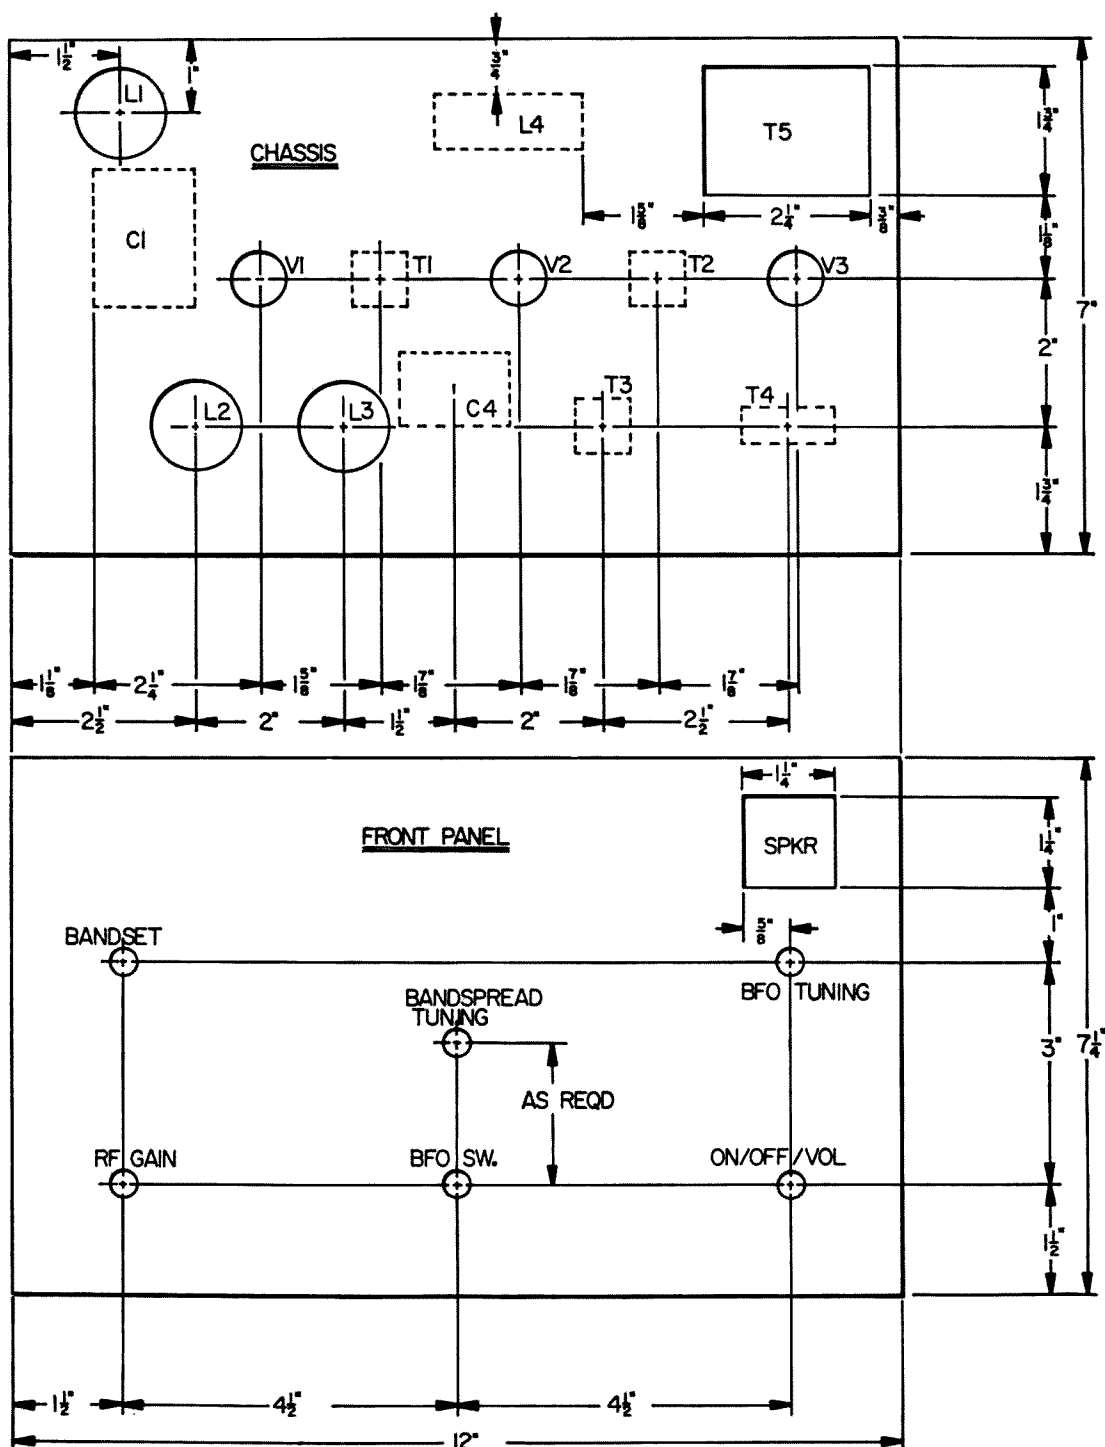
Mounting dimensions, hole sizes and general chassis layout.
